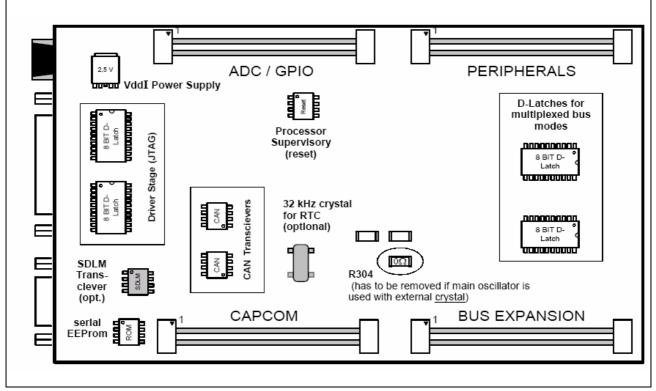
Bottom View of the board (the dashed part are not available on boards with XC164 MCU)
